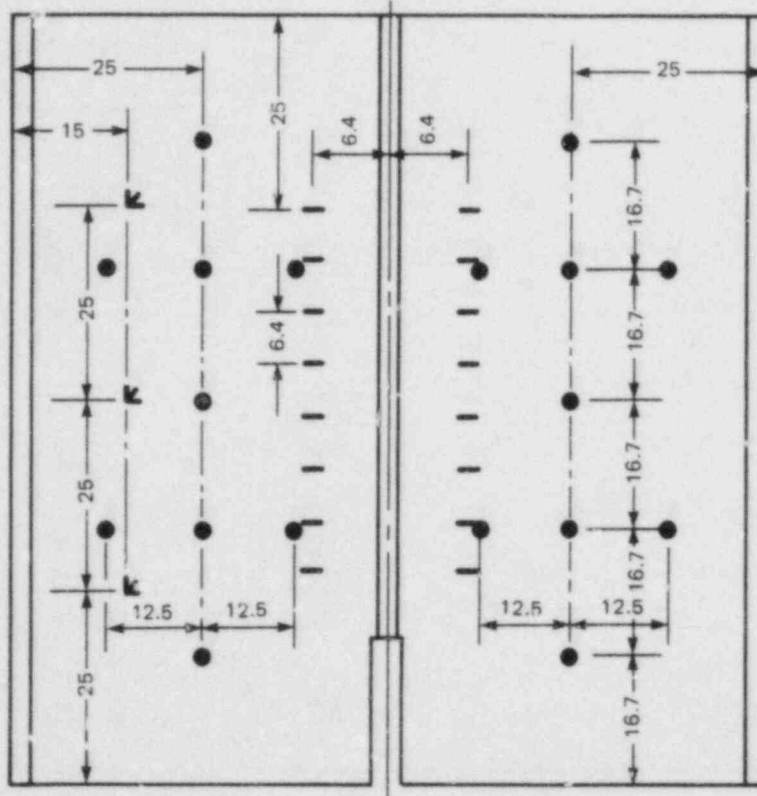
Pull-plate assembly to be used in NBS tensile machine to perform HSST crack-arrest experiment WP-1.1.
